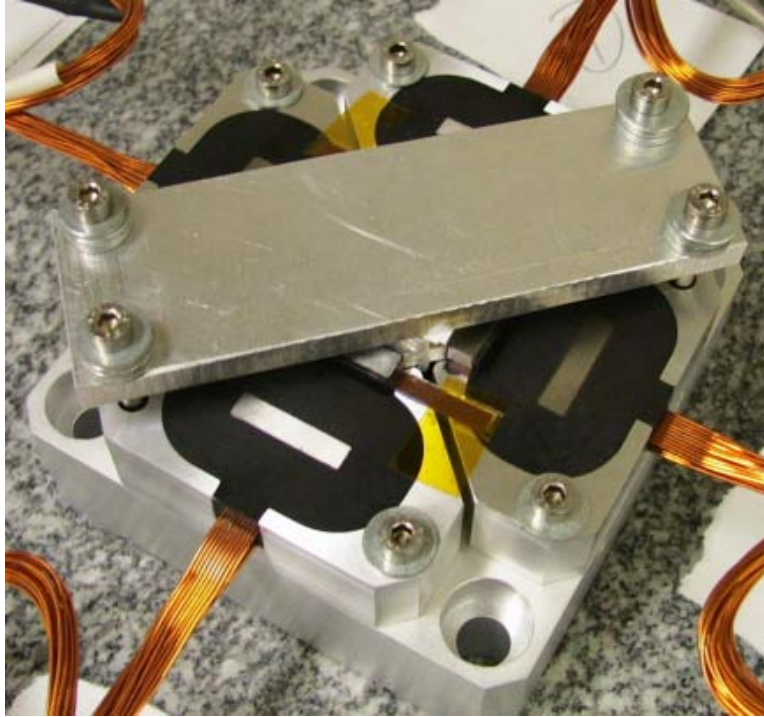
The mirror assembly clamped in place with a fixture plate prior to bonding of the axial flexure.
